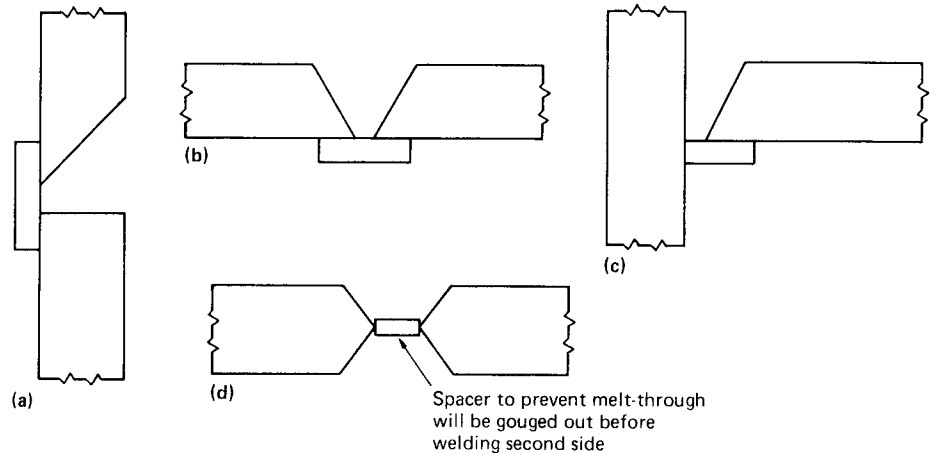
Welding edge preparations for wide root openings. (a), (b), and (c) Backing bars. (d) Spacer bar
